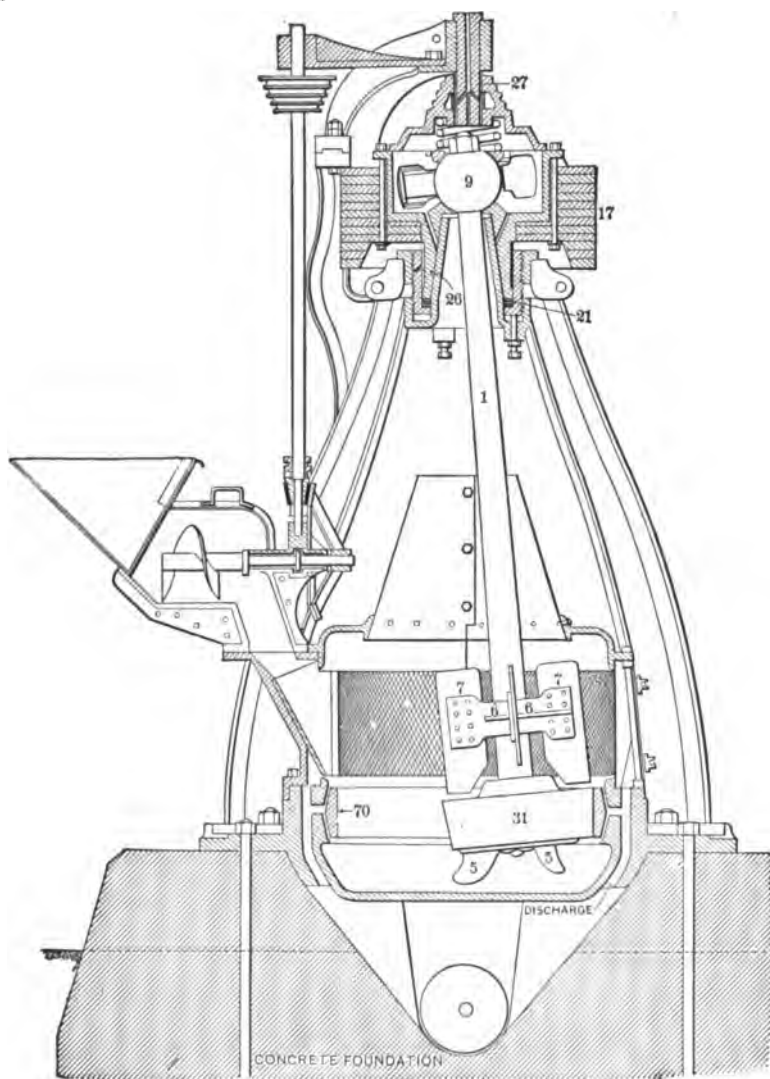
SECTIONAL VIEW OF 30-INCH GRIFFIN MILL ARRANGED FOR DRY PULVERIZING.
